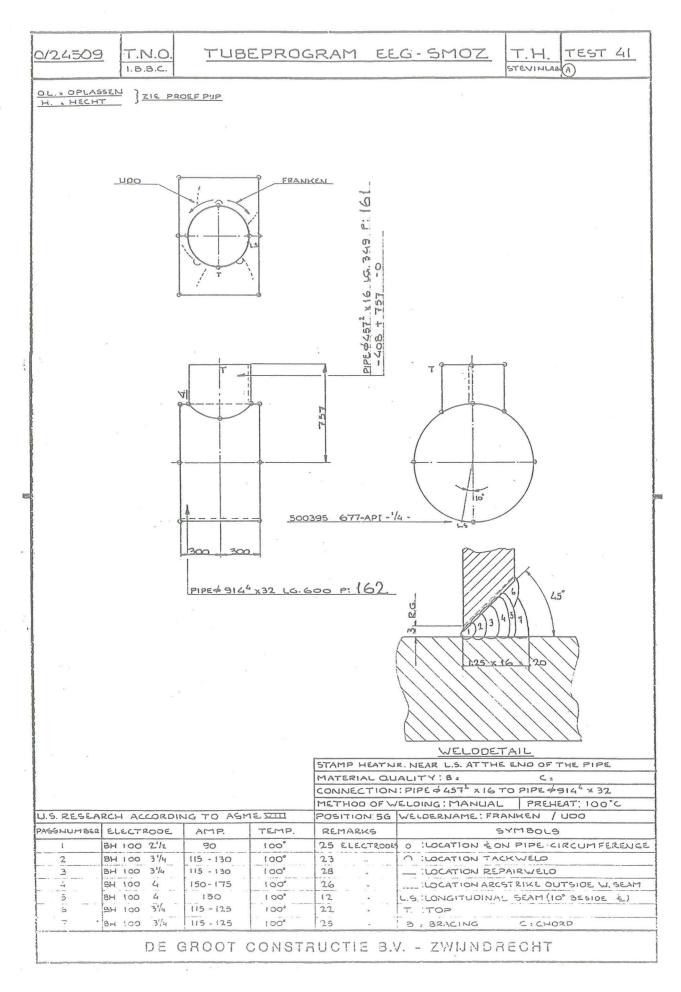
Test specimen 41: to check the weld procedure
